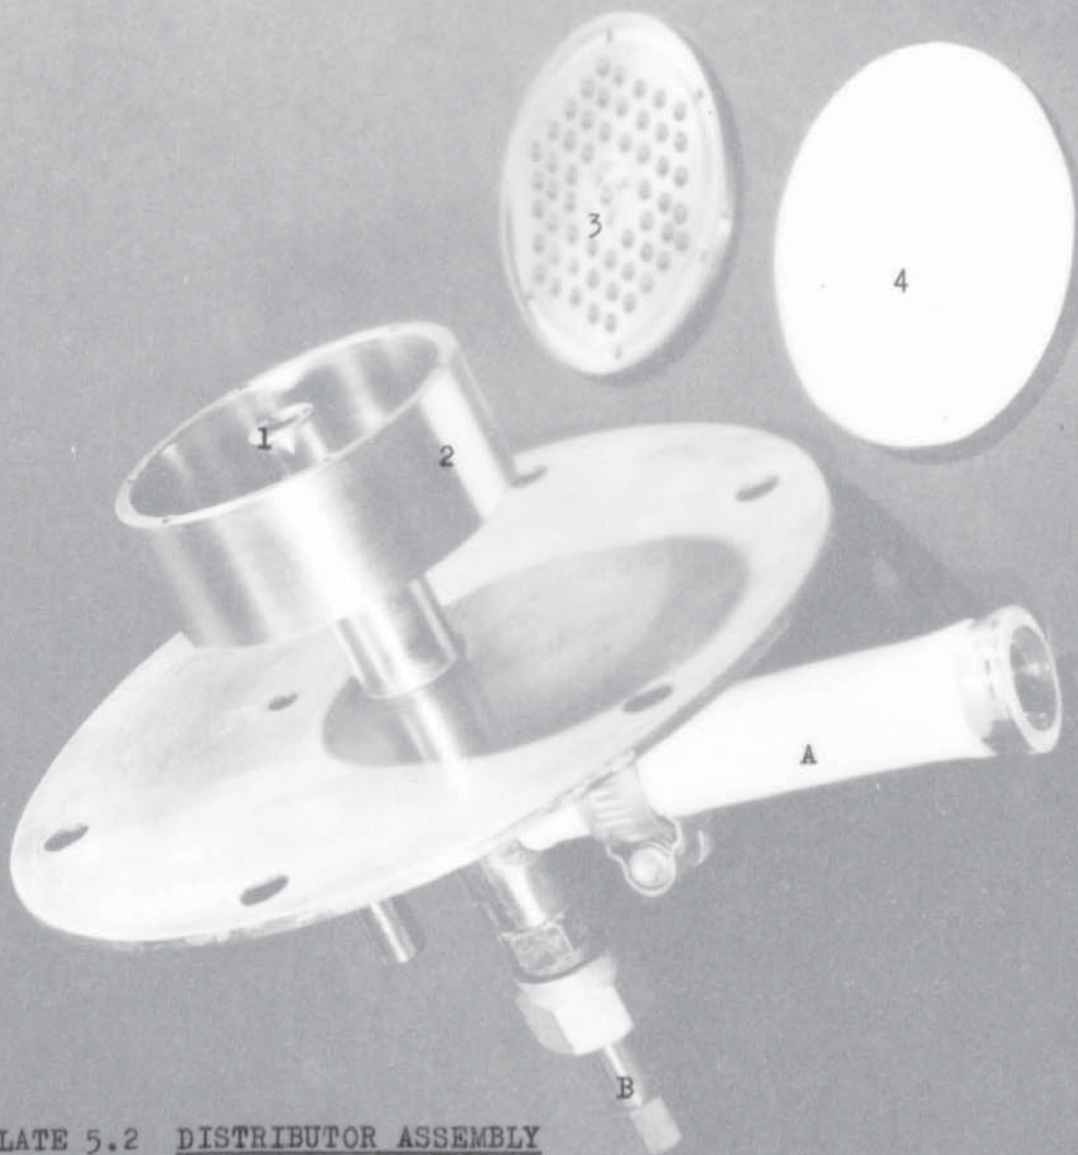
DISTRIBUTOR ASSEMBLY
